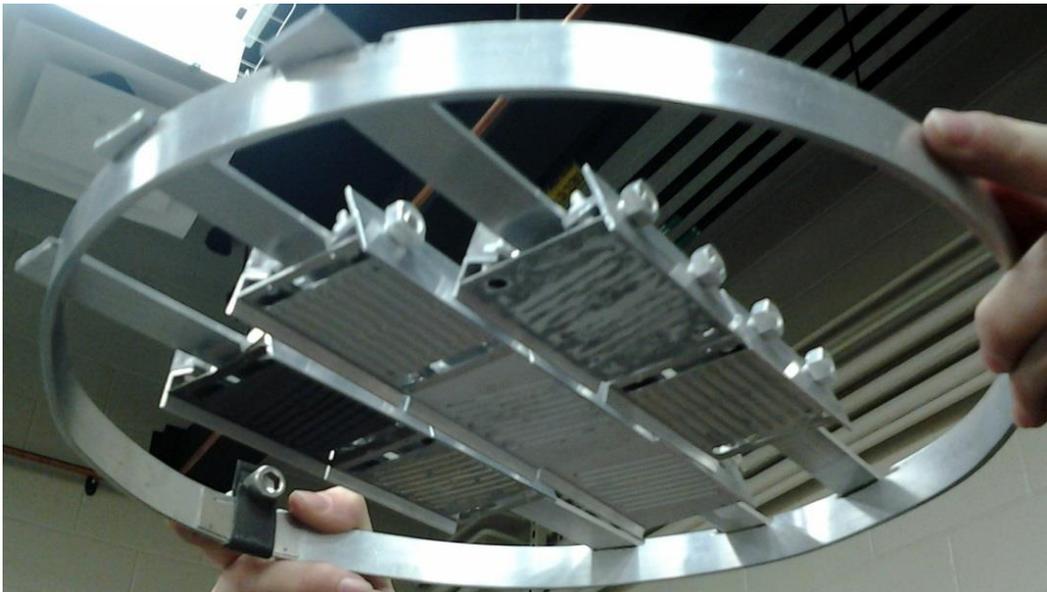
Fixture for copper vapor deposition upon aluminum laminae
